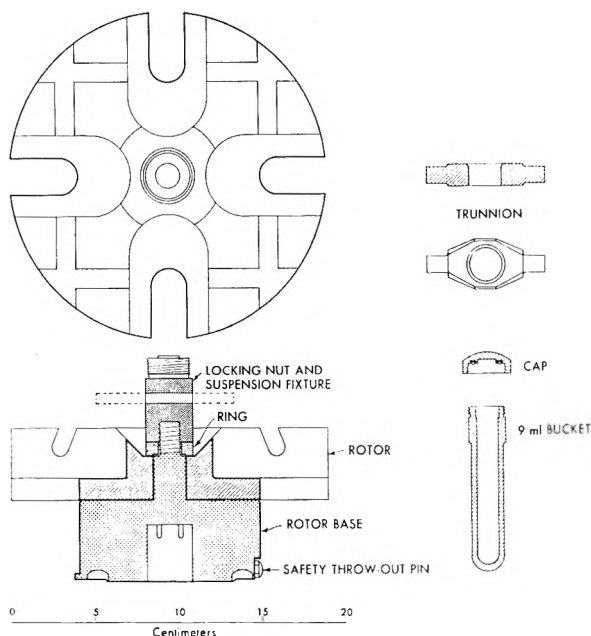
Scale drawing of the rotor assembly, a trunnion, and 9-ml. swinging-bucket assembly.
